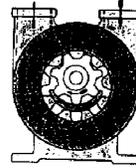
INTERNAL GEAR PUMP (with crescent)
